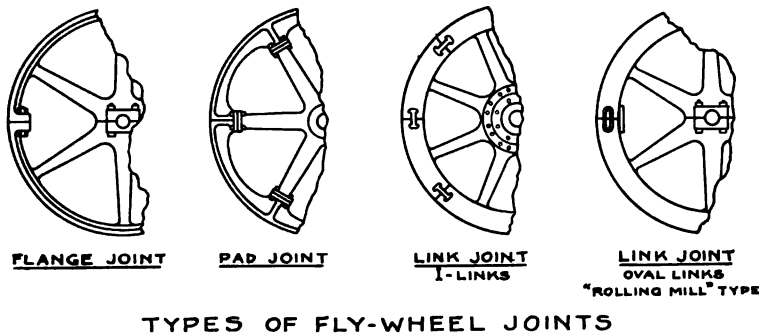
Drawing showing Common Types of Fly-Wheel Joints.
